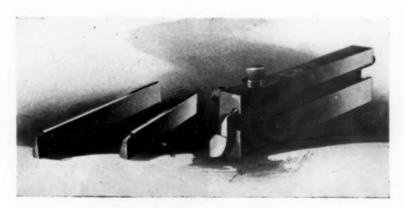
View of Other Side of Tool Shown in Fig. 8
